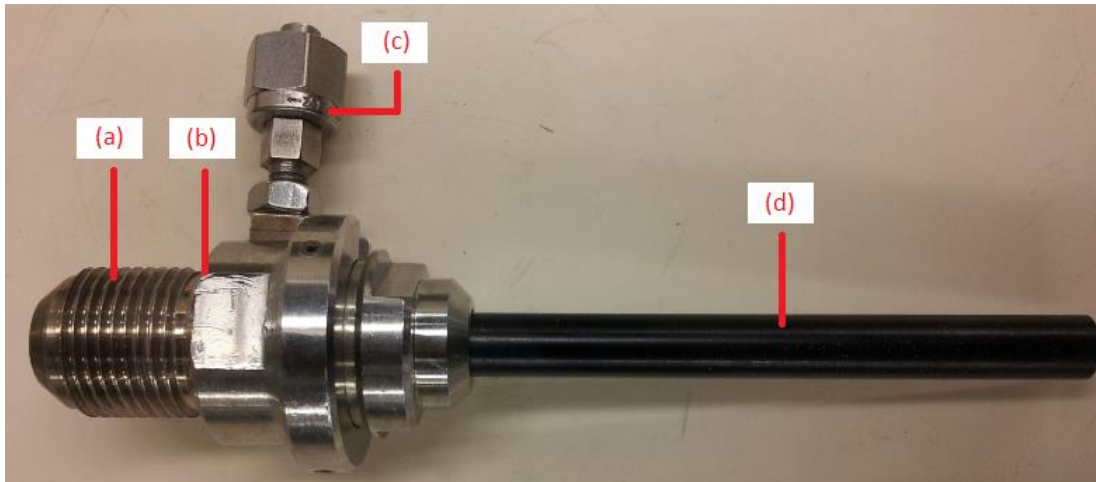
Converging-diverging nozzle of the SST-EP system a) converging section, b) the throat area, c) powder injection fitting, d) diverging section made of polymer
